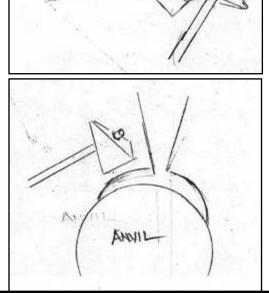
Take a good heat then ball punch on the back side to form the flippers. Then finish shaping the top fin.
